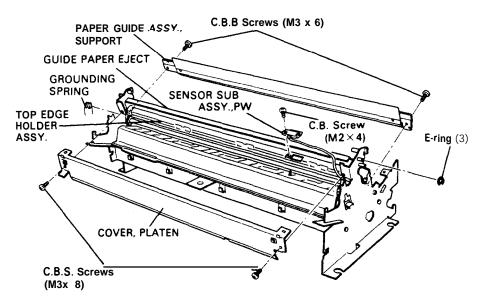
Disassembly of PLATEN ASSY. (1)
